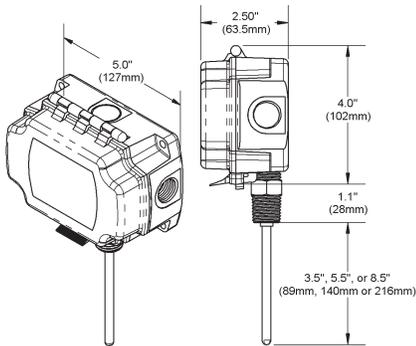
Double Threaded Immersion Sensor in a BAPI-Box (BBO) Enclosure with "Outside Mount" Configuration.
